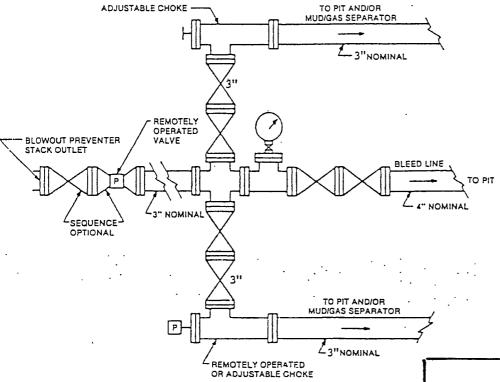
Typical choke manifold assembly for 5M rated working pressure service — surface installation.
